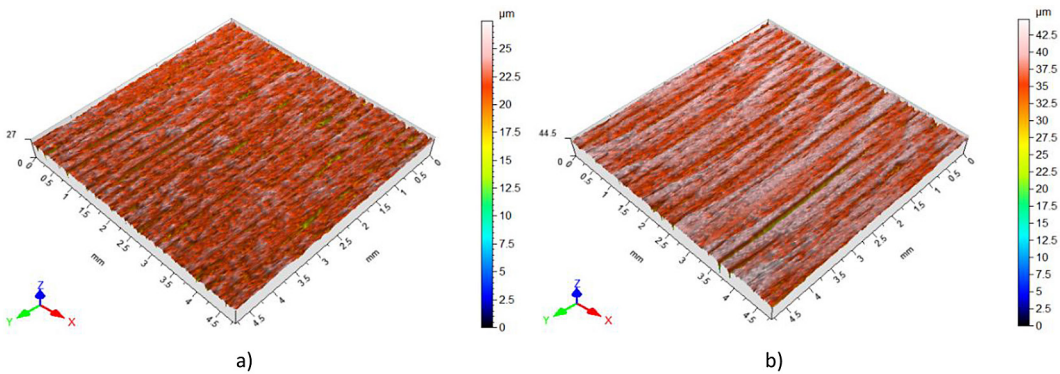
3D topography maps for the smallest 0.05 mm/tooth (a) and largest 0.60 mm/tooth (b) feed per tooth after milling the main surface of GFRP
